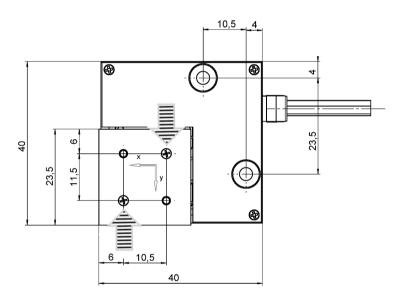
The arrows show the screws used to disassemble the XYZ mounting platform.
